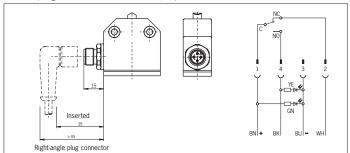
Dimension drawing/connection diagram for N01.550C1526 with plug connector M12 (4-pin)
